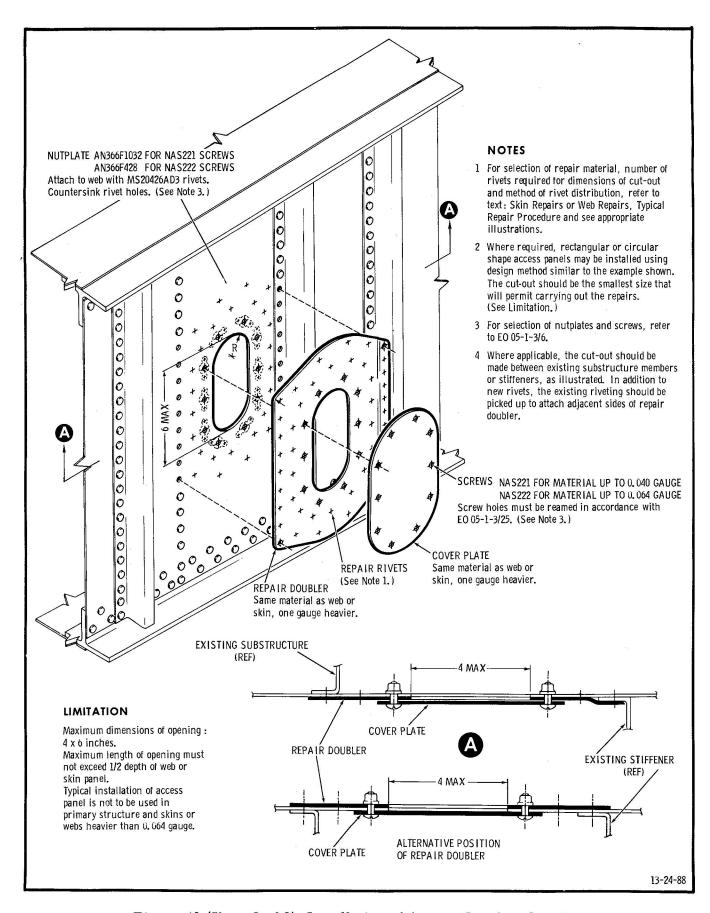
(Sheet 2 of 2) Installation of Access Panels - Lap Type
